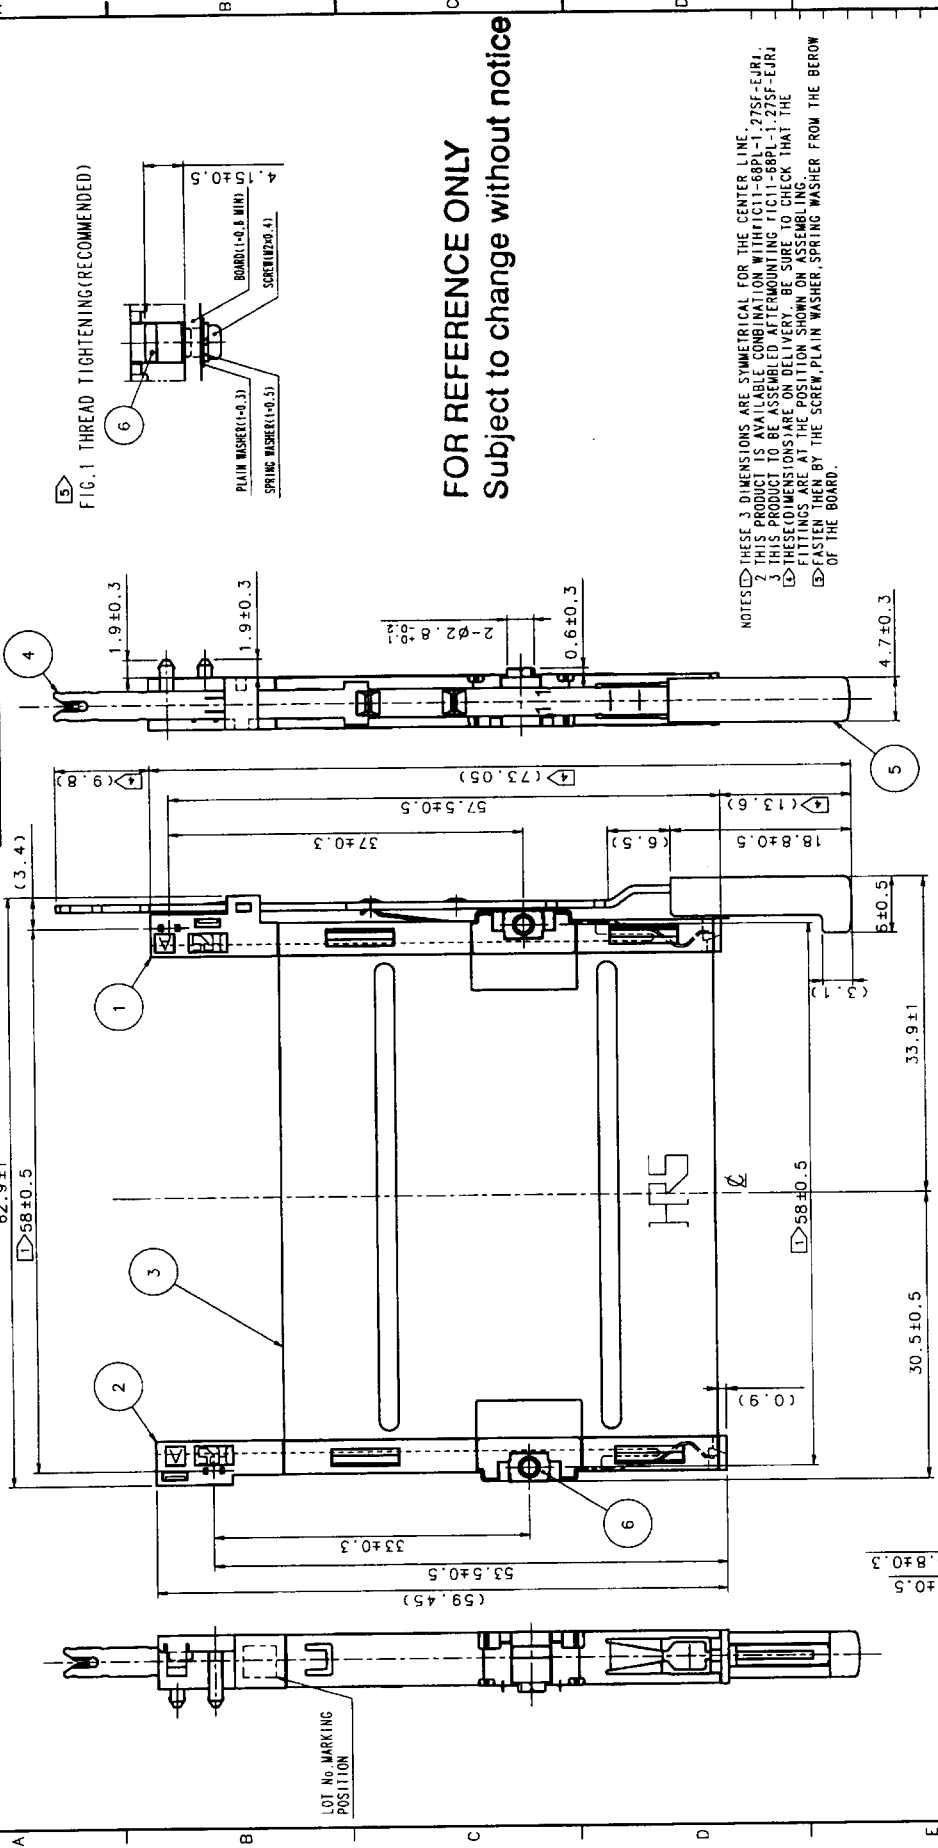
THREAD TIGHTENING (RECOMMENDED)
